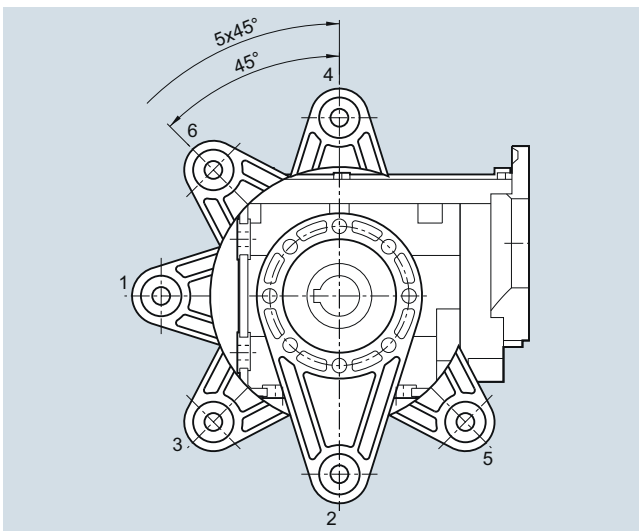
/8 Bevel gearboxes BAD., sizes 19 and 29
